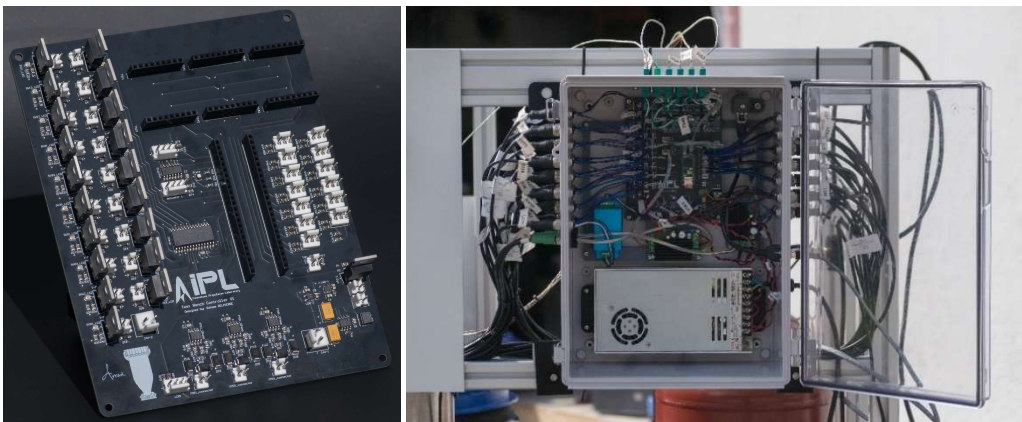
Custom PCB (left) and electronics case installed on the test bench (right)
